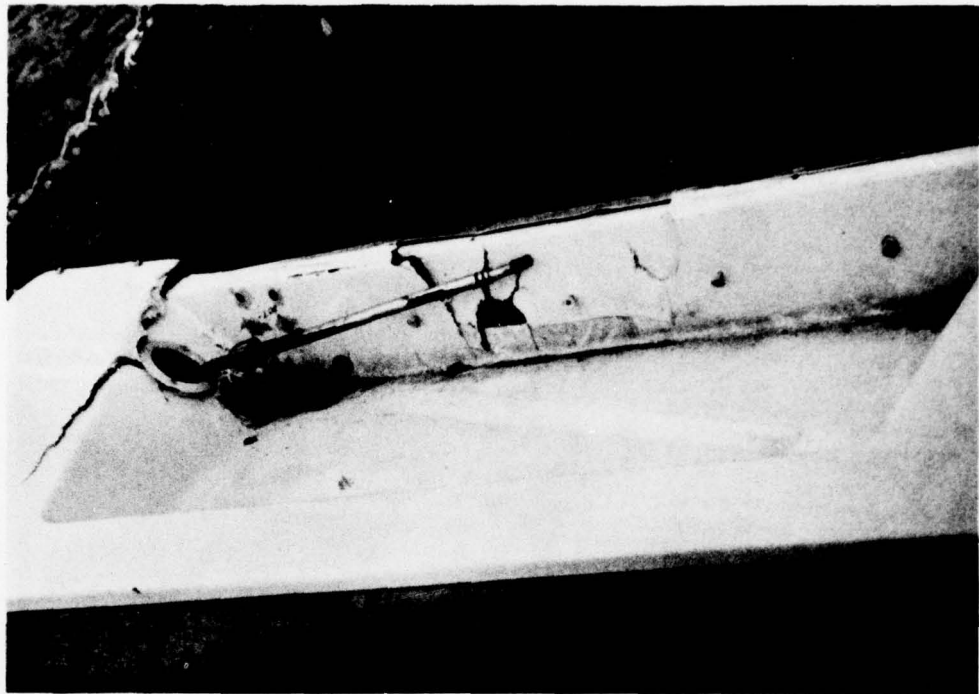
14' (4.3 M) RUNABOUT. DETAIL OF MOTOR WELL, TRANSOM AND STEERING CONTROL DAMAGE
